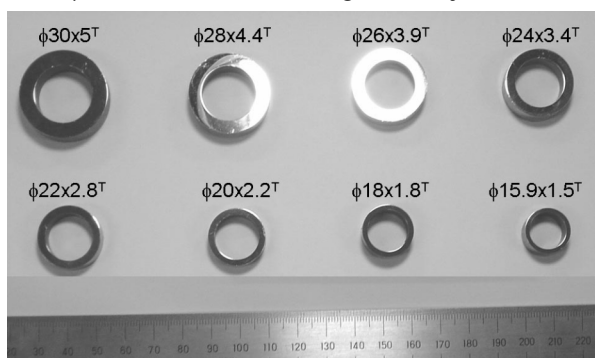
Cross section of F82H cylindrical tubes.
